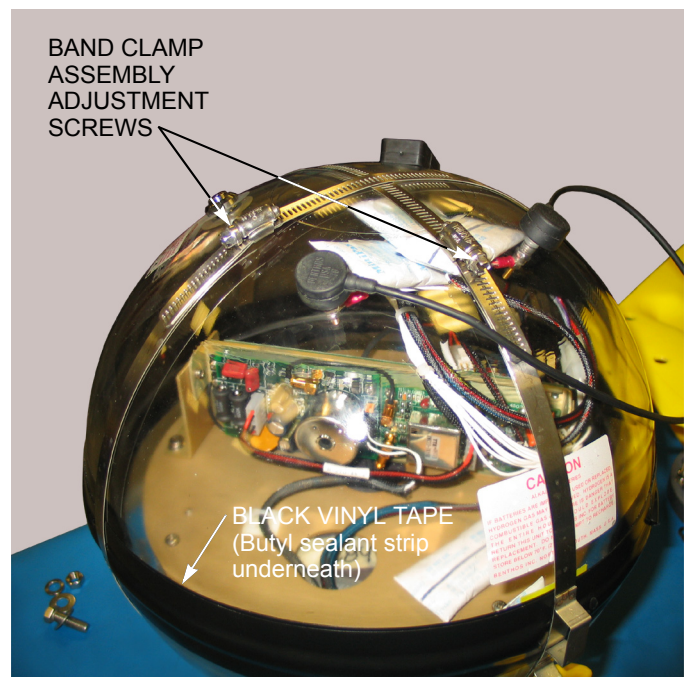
Band Clamp Assembly Adjustment Screws and Black Vinyl Tape
